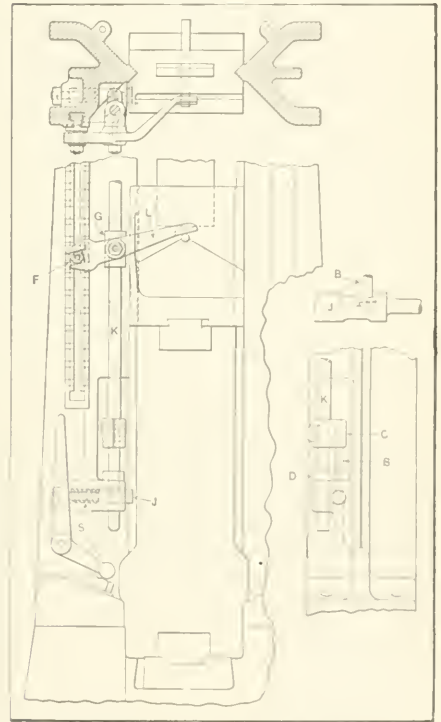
Detail View of Releasing Lever and Automatic Trip of Drop-hammer shown in Fig. 1
